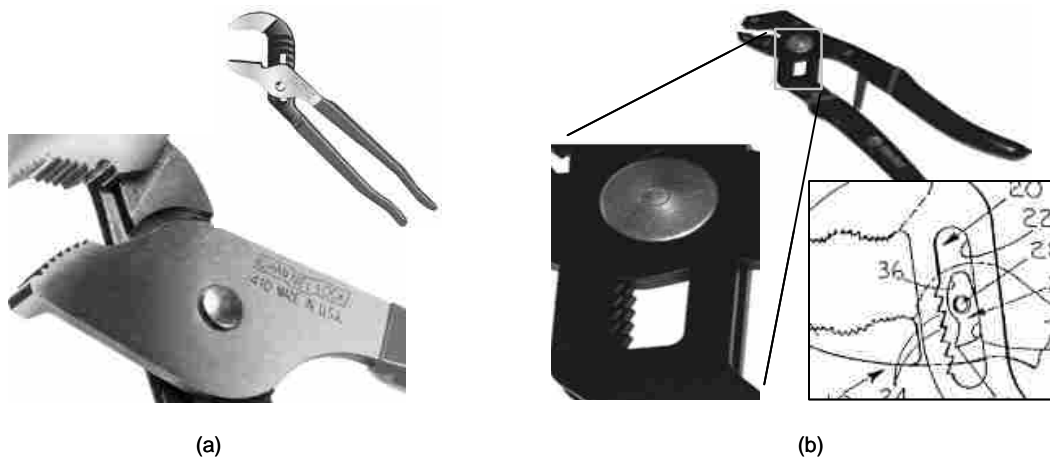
Examples of discrete adjustment: (a) Channellocks manually adjustable Tongue-and-Groove Pliers, and (b) RoboGrips Self-Adjusting Pliers [13].
